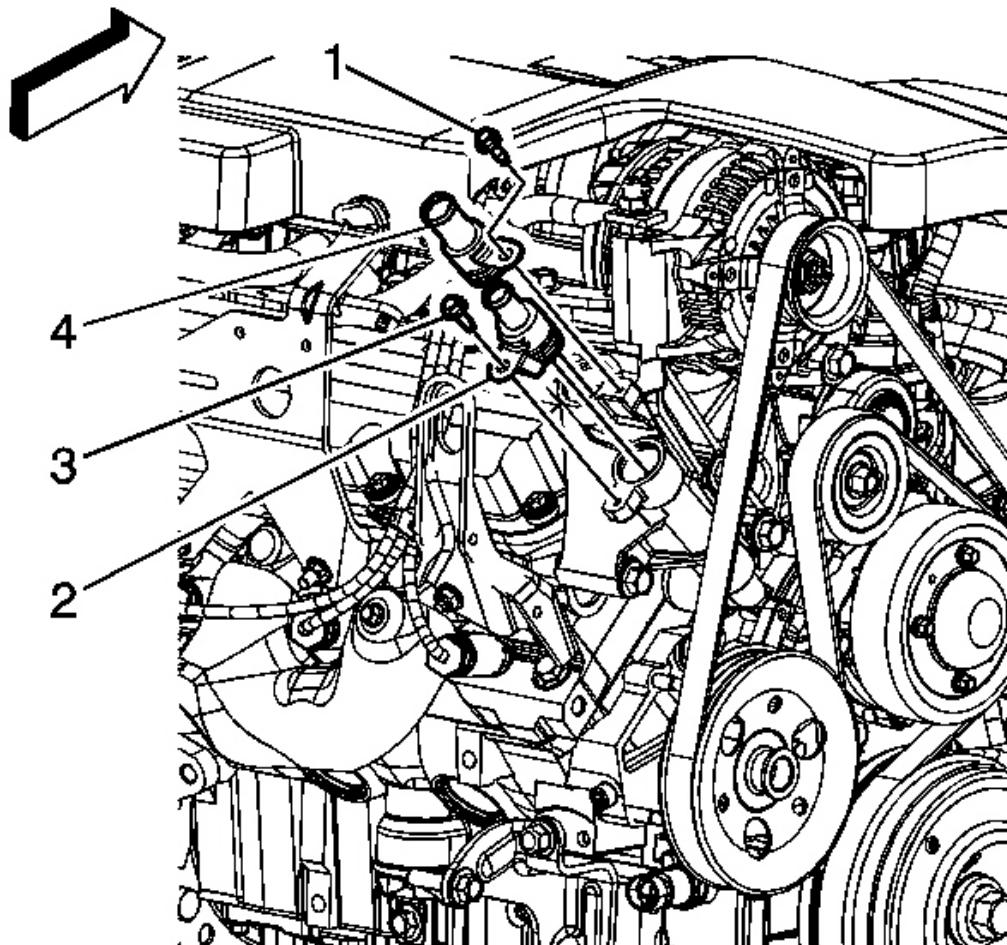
Identifying Drive Belt Tensioner Bolts
